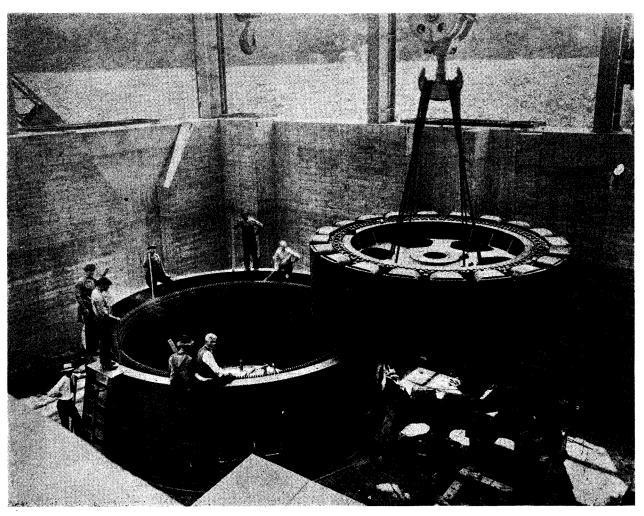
Power House View of a Large Rotor Suspended by the Power House Crane.
